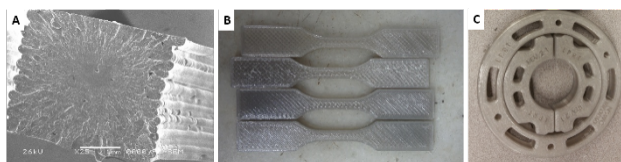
Scanning electron microscopy and optical images of recycled polyethylene terephthalate (PET). (A) Fracture surface of 3D printed tensile bar, (B) 3D printed tensile bars, (C) 3D printed lodge projectile removal tool (LPRT).
